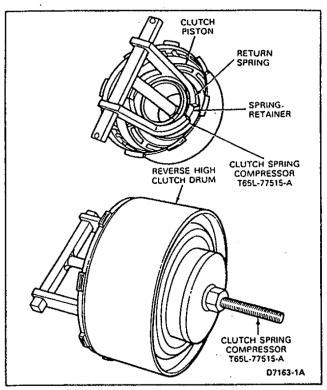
Removing or Installing Reverse—High Clutch Piston Snap Ring
